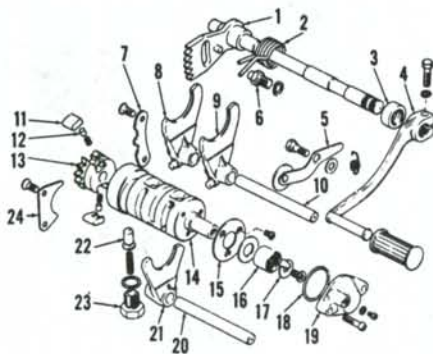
Component parts of shifter assembly used in the late models. Shift forks (8 & 9) are interchangeable.
